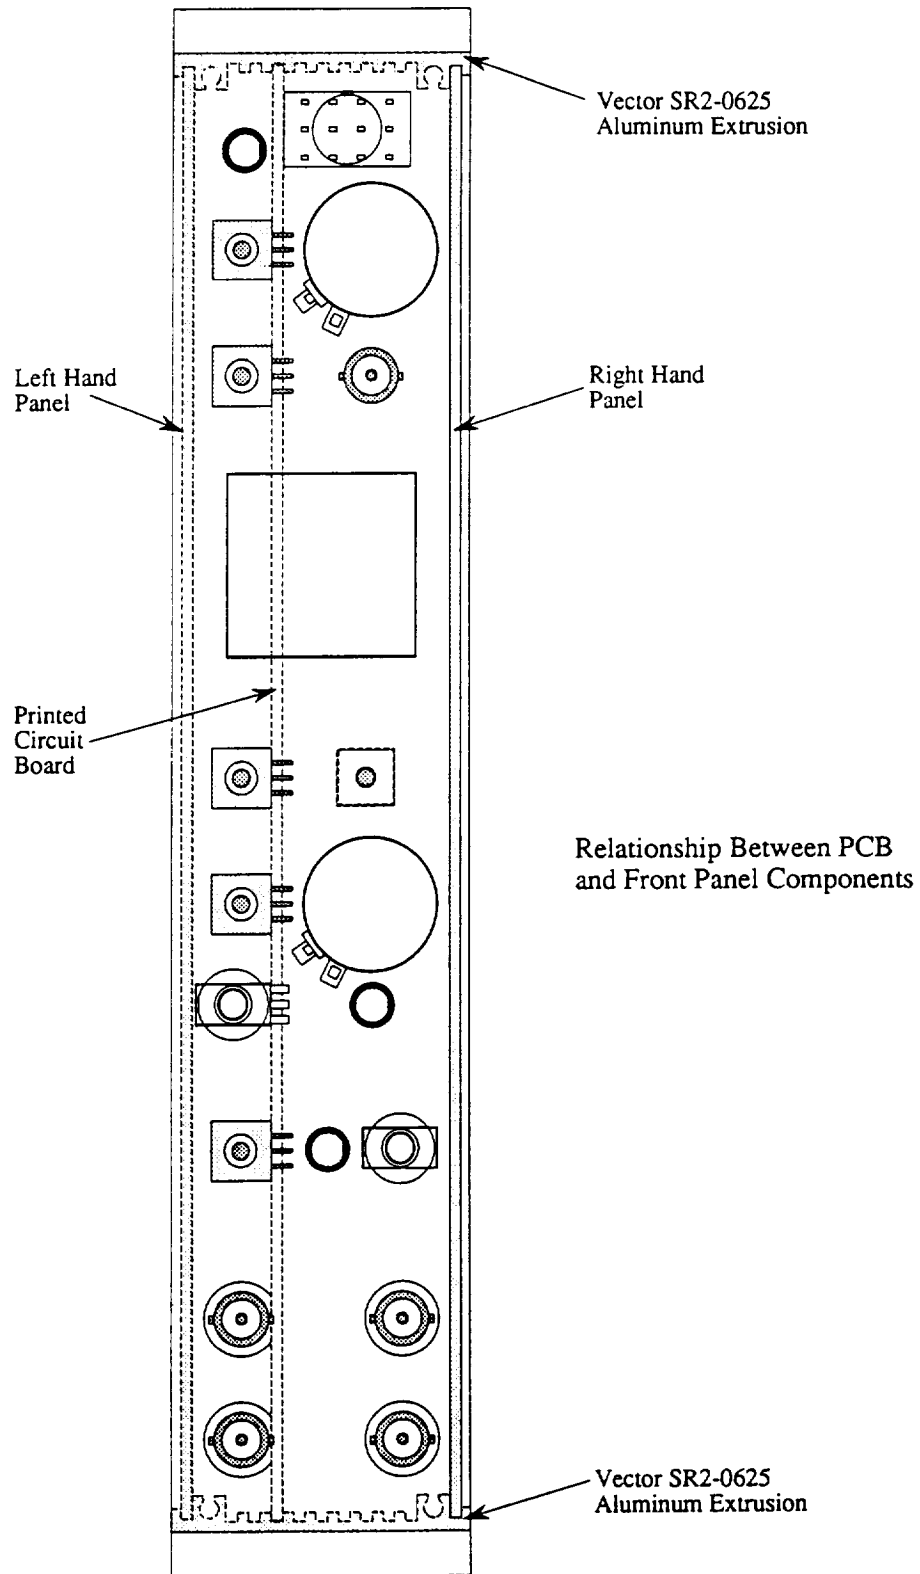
Relationship between chassis, PCB and front panel components.
